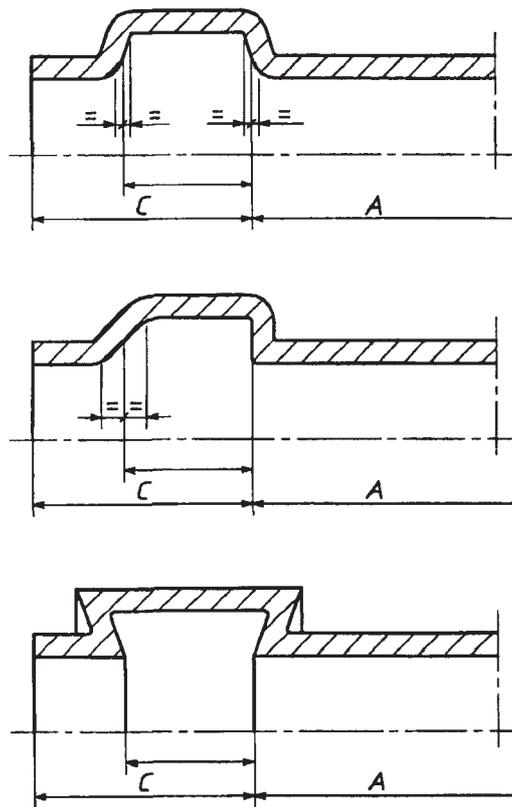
Typical groove designs for elastomeric ring seal sockets
